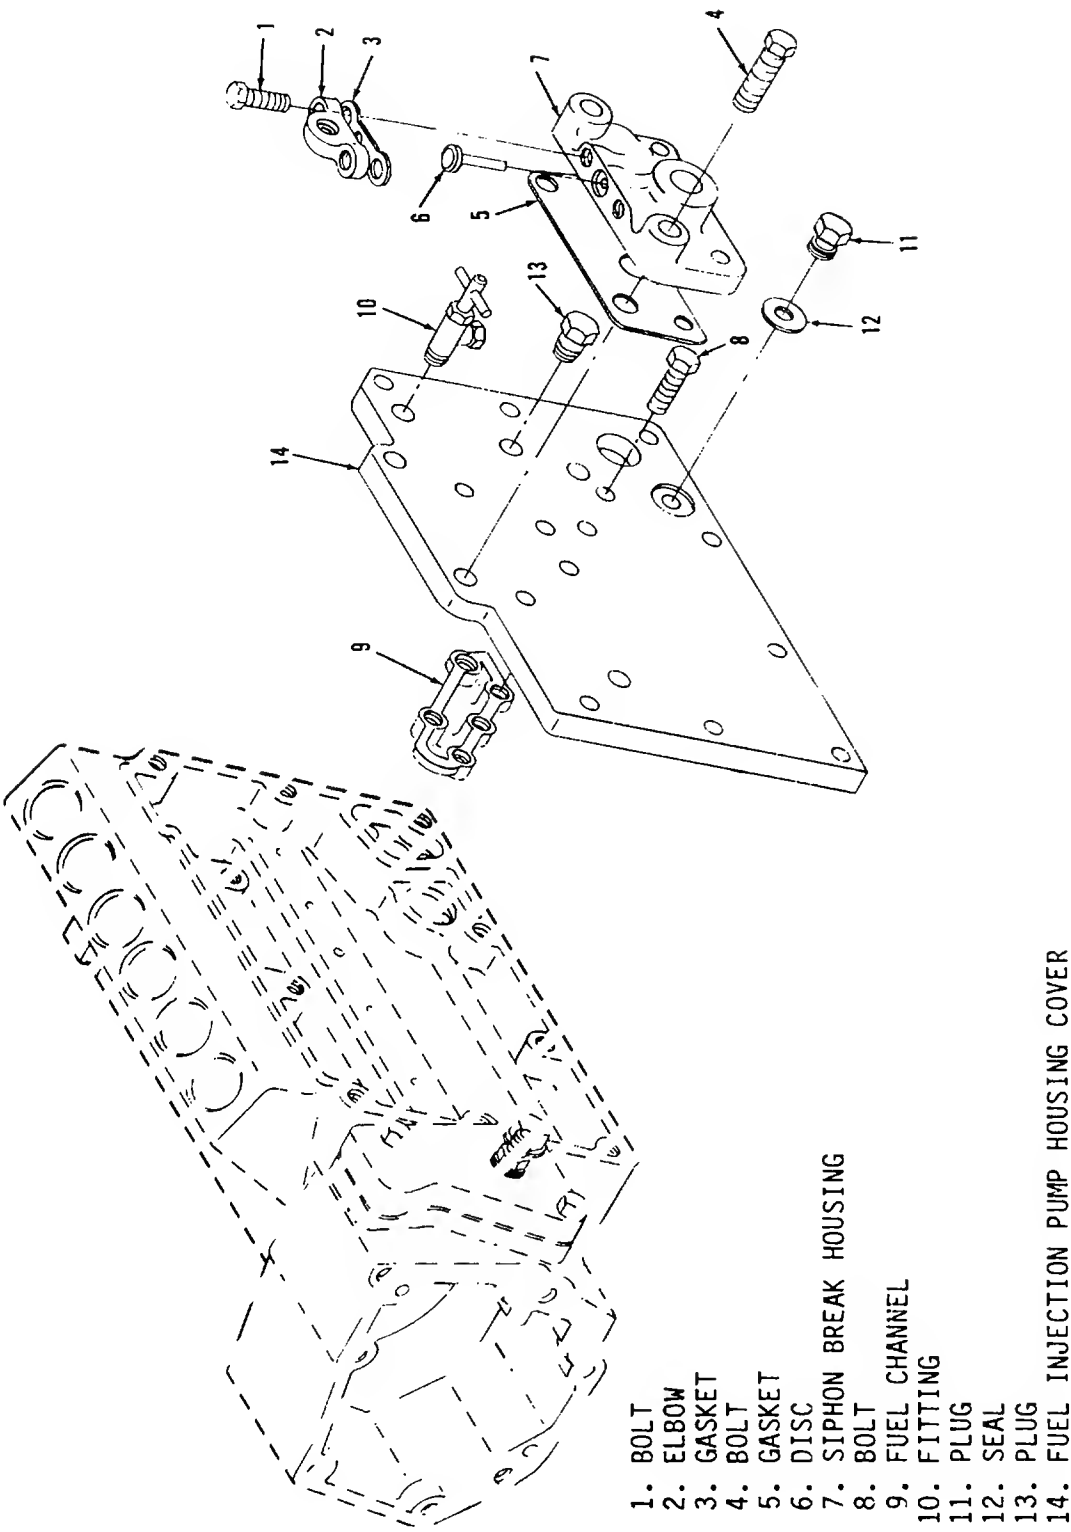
Fuel Injection Pump Housing Cover, Disassembly and Assembly
